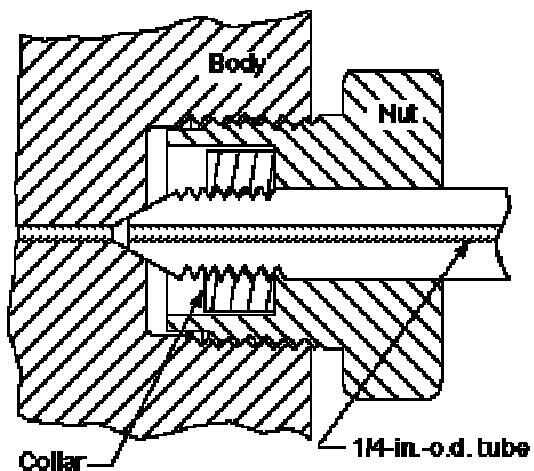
Typical 1/4-in. high-pressure coned and threaded fitting (60,000 psig).
